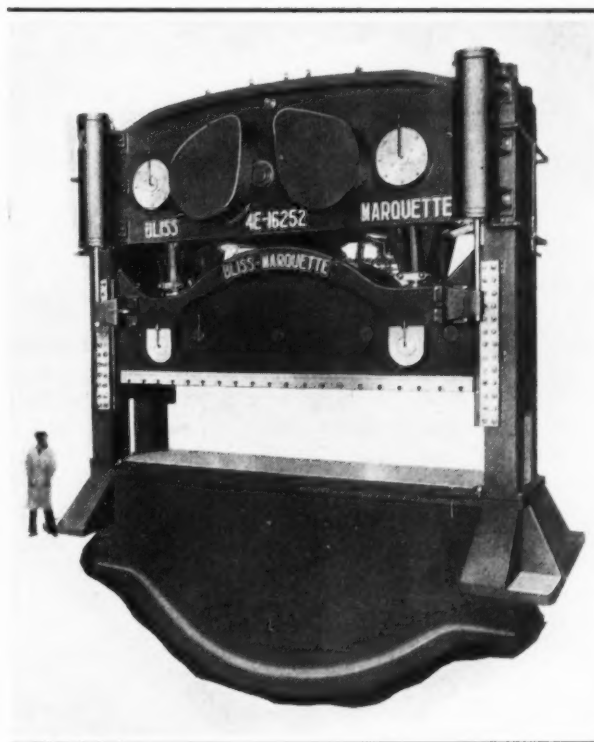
The Largest Press of Welded Construction Ever Built—It Measures 21 Feet between Housings
